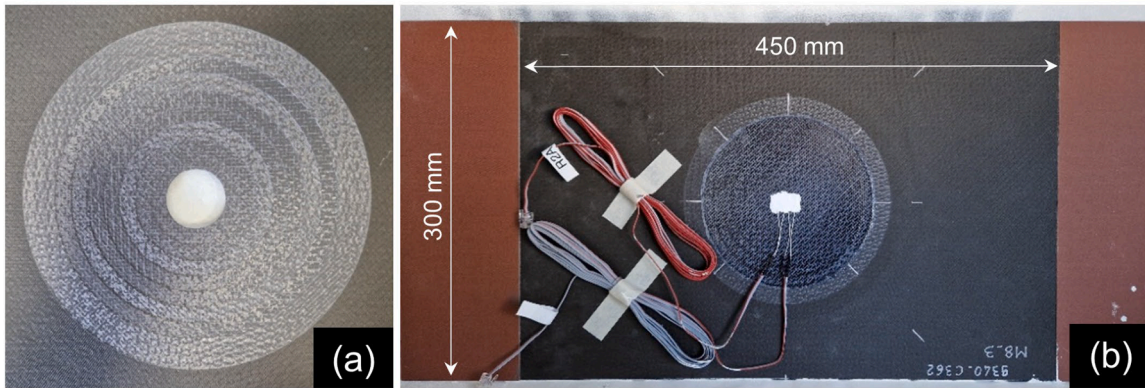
Stepped repaired panel specimen example. (a) Close-up view of the stepped shape after water jet abrasion machining. (b) Global view of the panel after performing the repair and adding the strain gauges.
